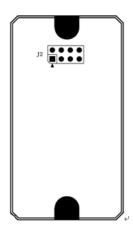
O2/N2O/Air Flow Sensor Interface Board, Bottom View
